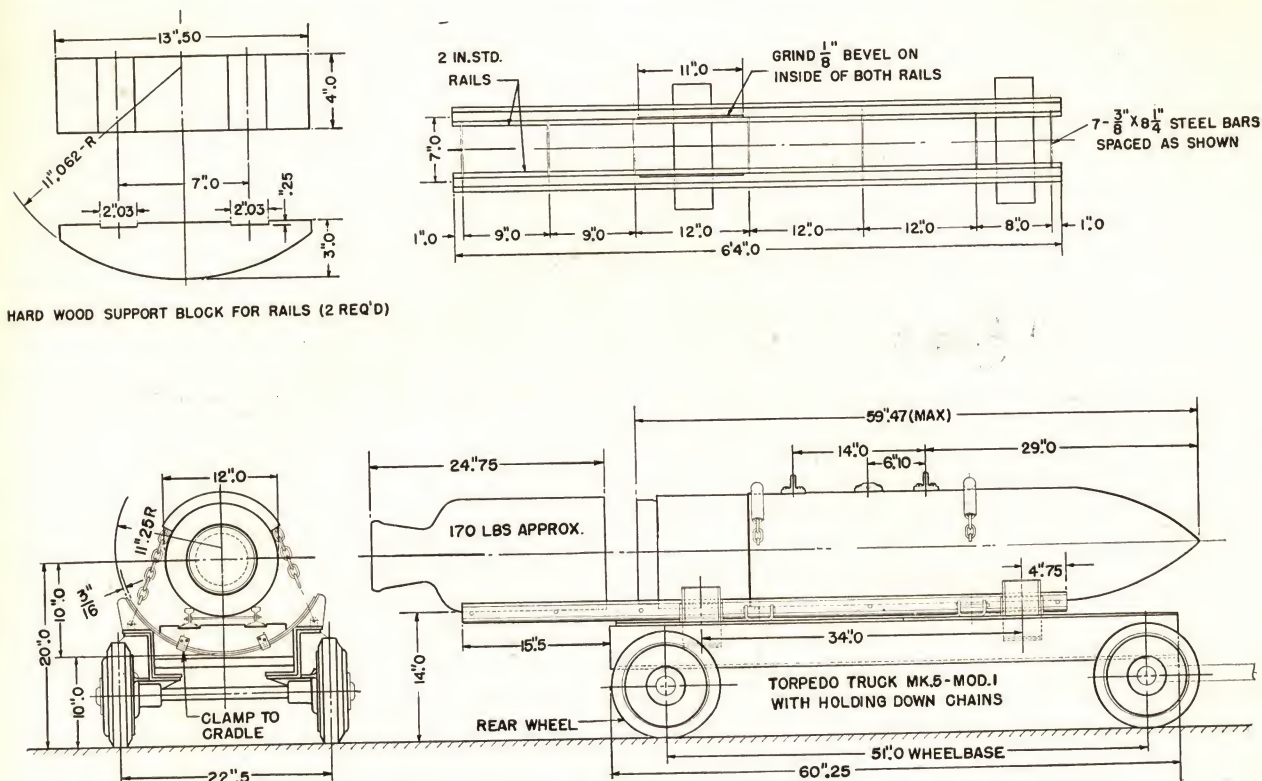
BuOrd Dwg. 422652, Assembly Rig
